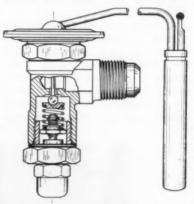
Drawing showing valve interior. Adjusting nut on the bottom functions without moving up or down.
